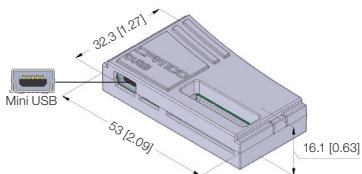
CFW100-CUSB dimensions in mm [in] and mini USB connector
